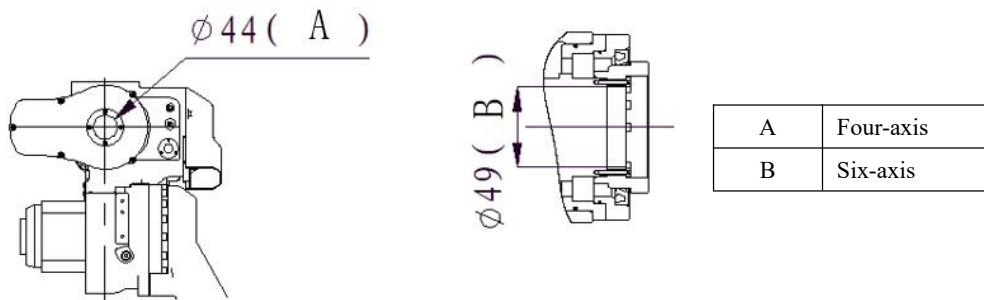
SA6/1440H four-axis and six-axis hollow diameter dimensions
